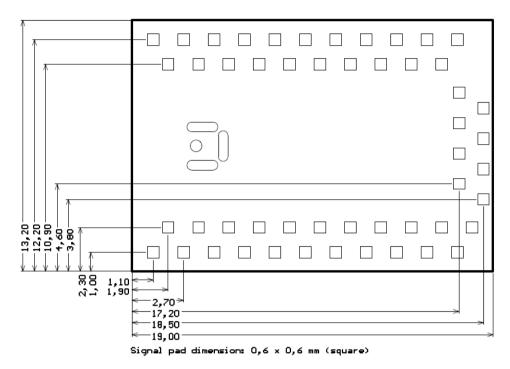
Module dimension and signal pad geometry deRFmega128-22M10 (top view)
